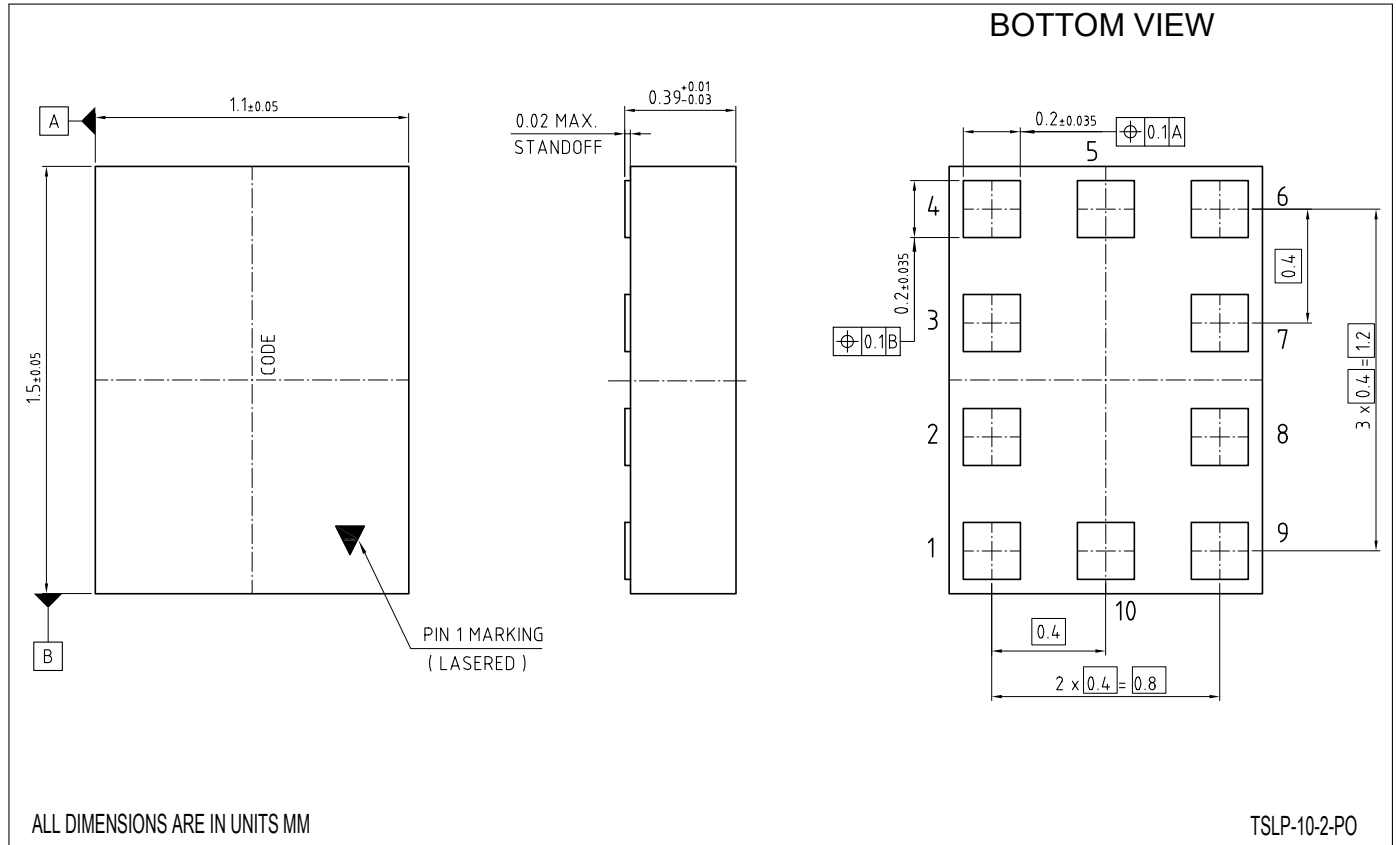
TSLP-10-2 Package outline (top, side and bottom views)
